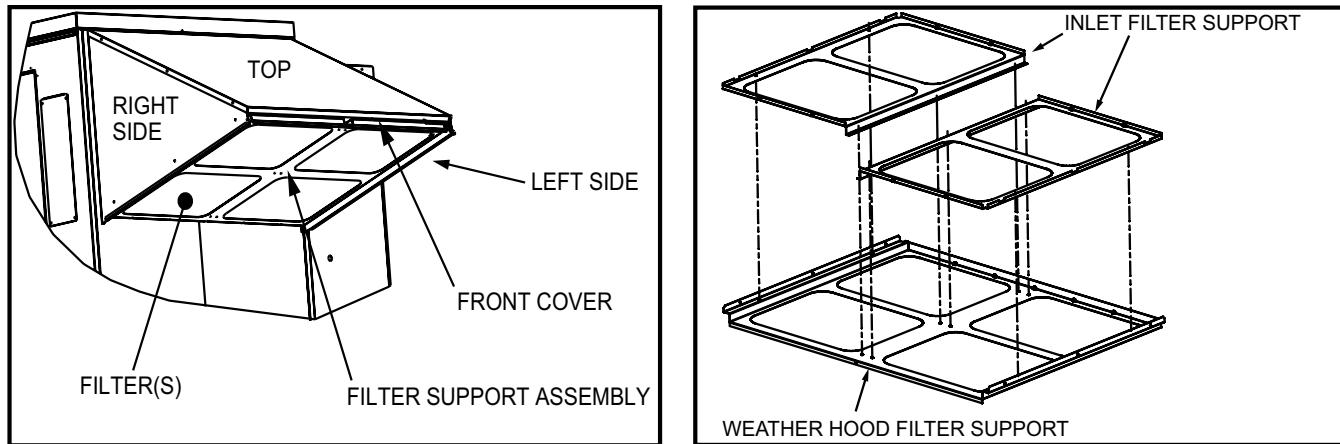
Outside Air Hood Assemblies (Refer to [Table 28](#))
